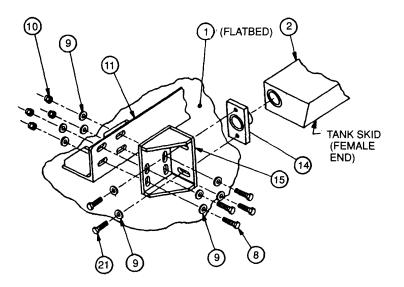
Angle/Bracket/Socket Adapter Assembly.
